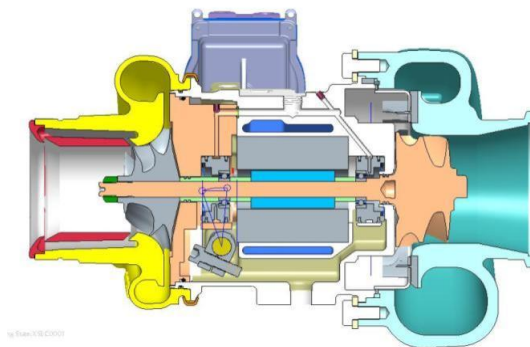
Electrically assisted turbocharging : integrating electrical machines within existing high speed machinery [Cummins]
